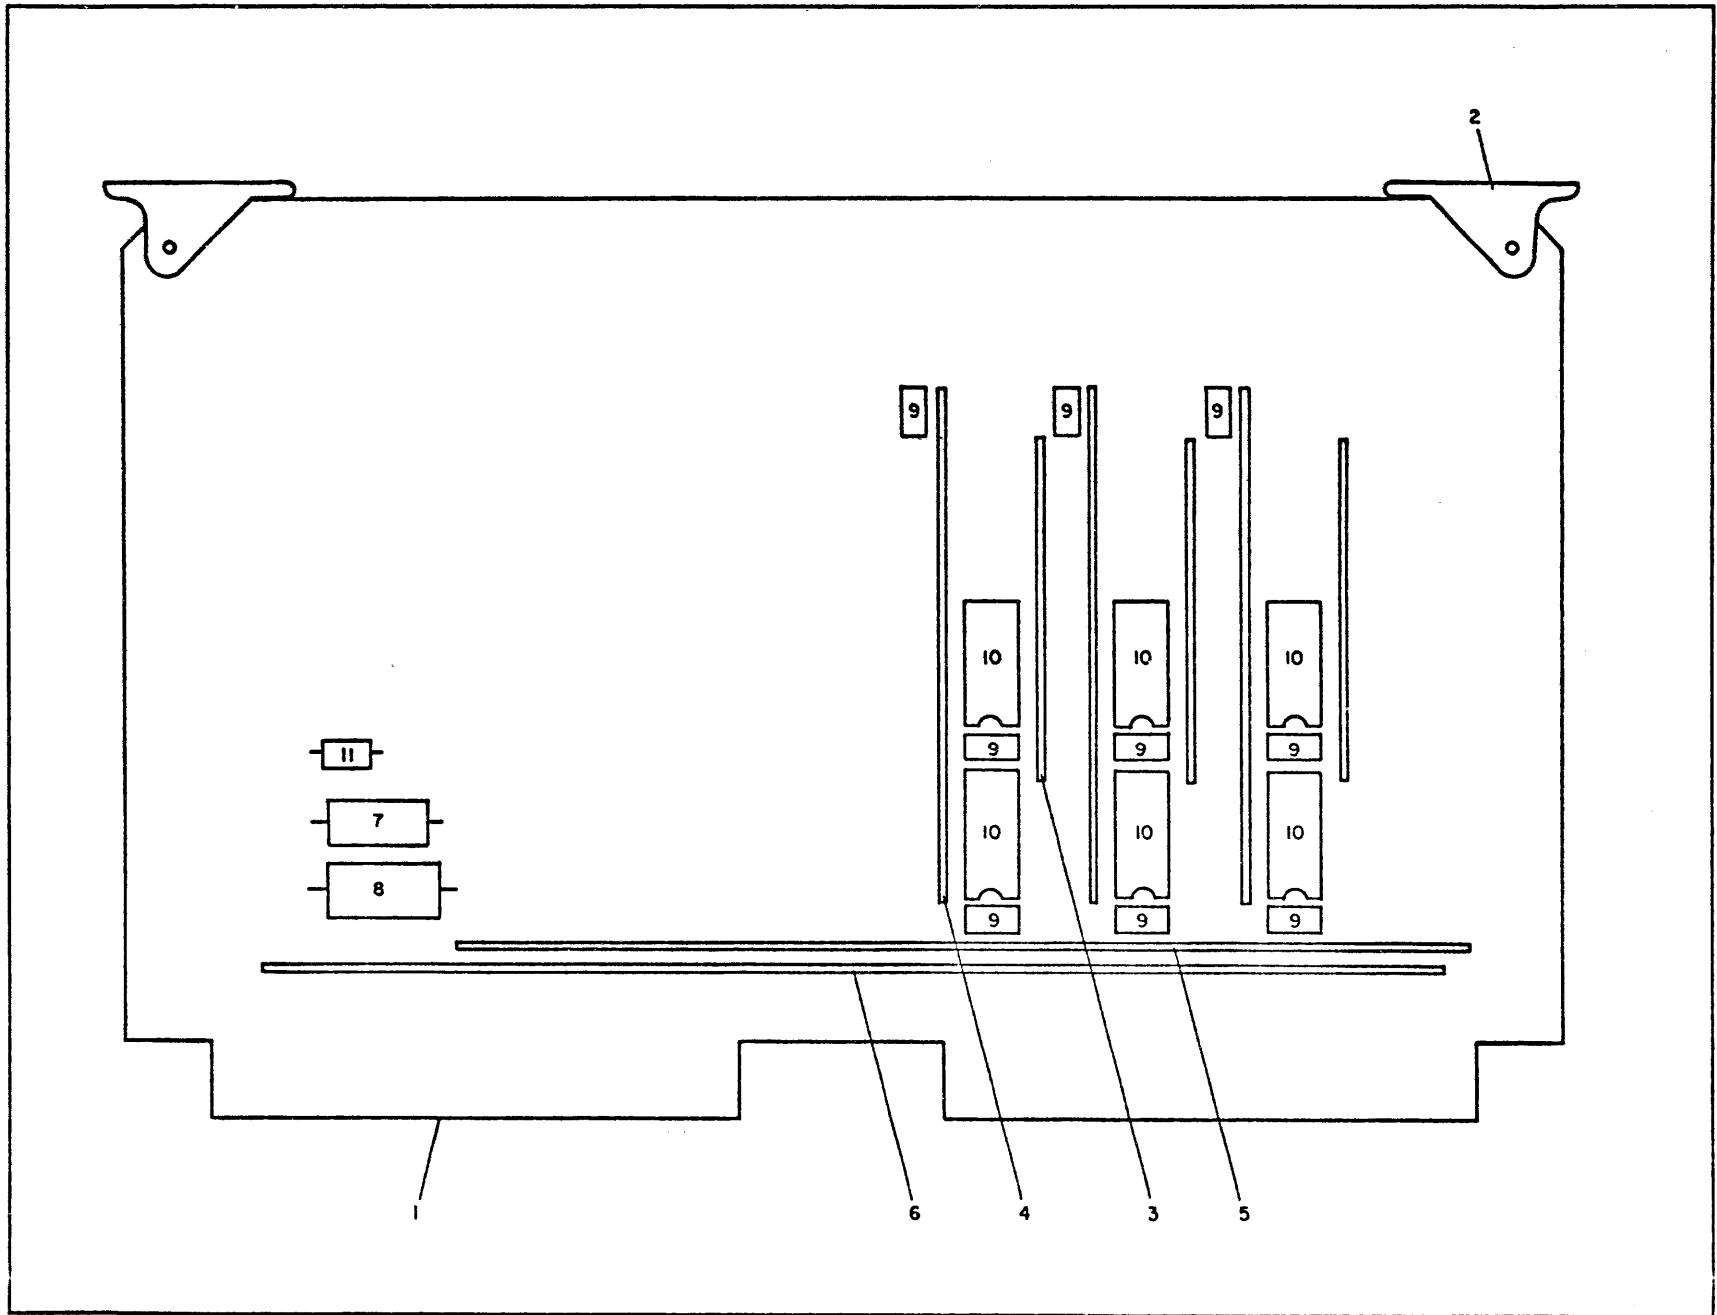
P.C. ASSEMBLY, DRIVER CARD (Model 2893A)
